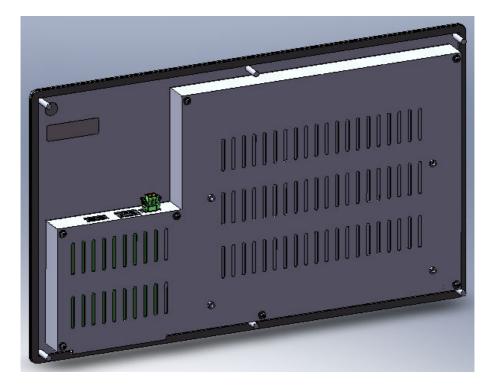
Rear view of VDP81.1 HMI operator panel
